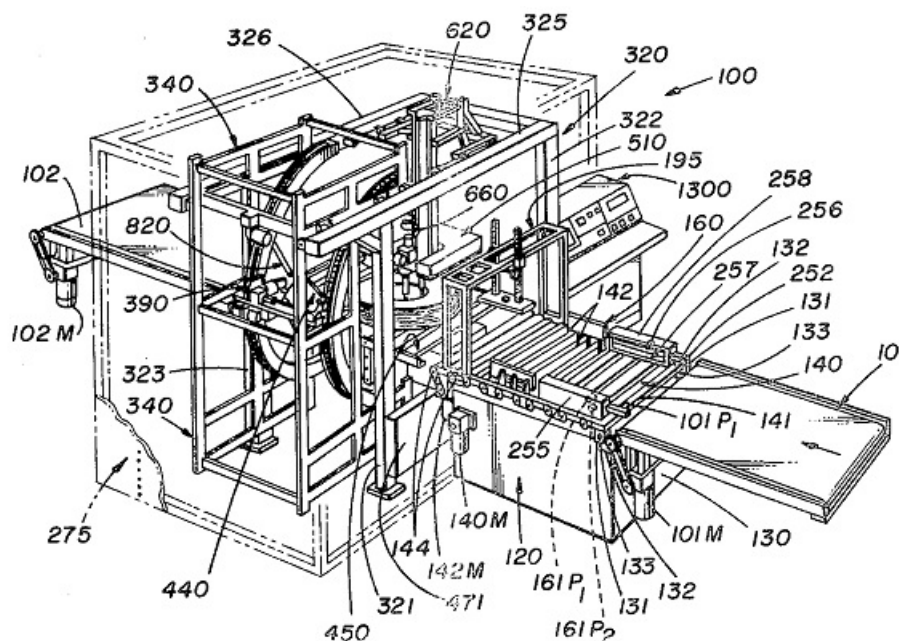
Tire inspection system based on X-ray technology (source: [9])
